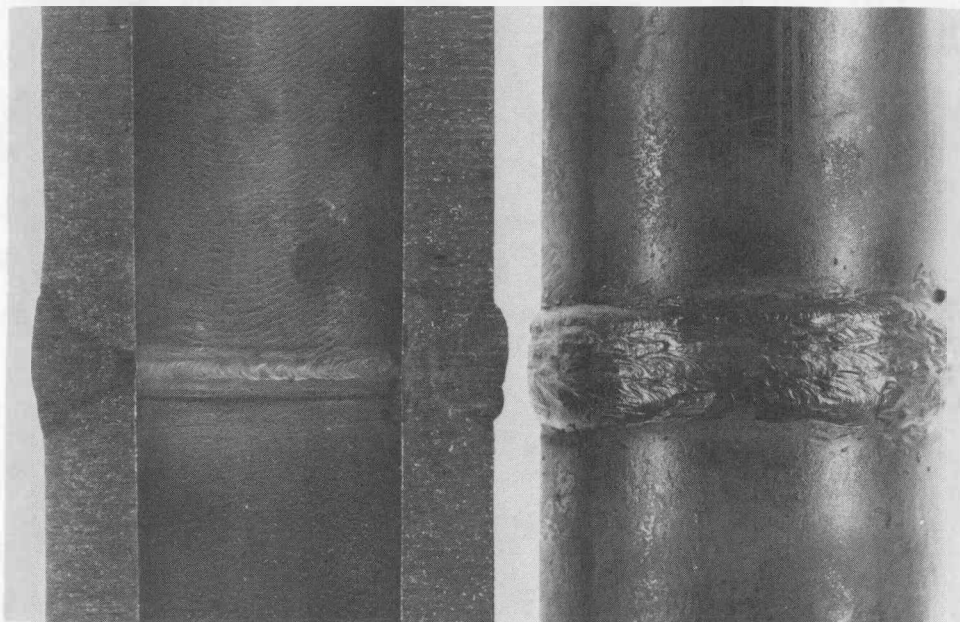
Shielded metal arc weldment in modified 9 Cr-1 Mo steel 76-mm-OD tubing.
